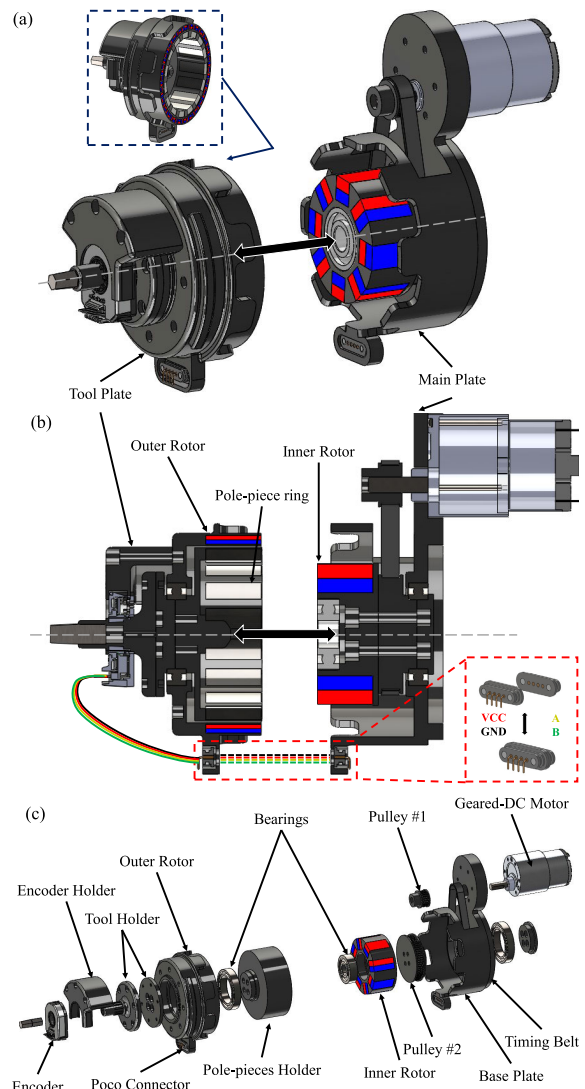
Schematics of the tool-changing module. (a) tool-changing module, (b) cross-section view, and (c) exploded view.
